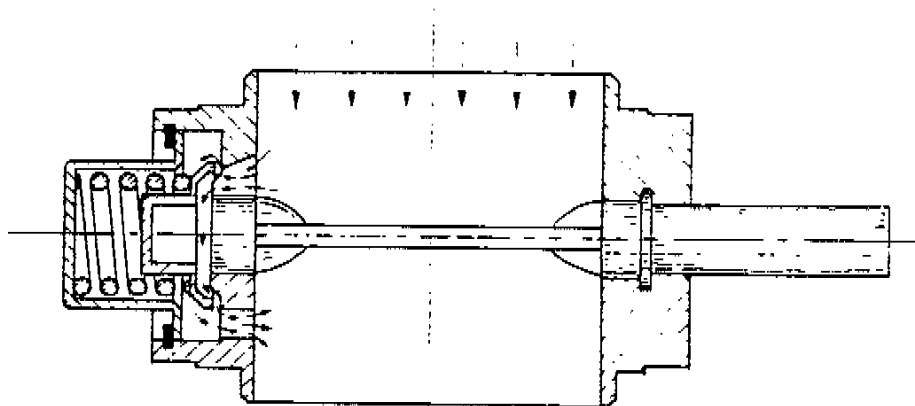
'Haller' Butterfly Valve Exhaust Brake [4.5].
